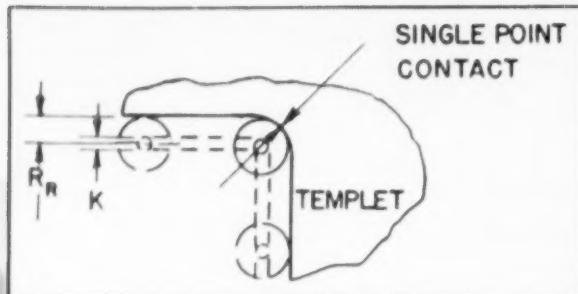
Illustration showing the relationship between the inside corner templet radius to the roller radius.
